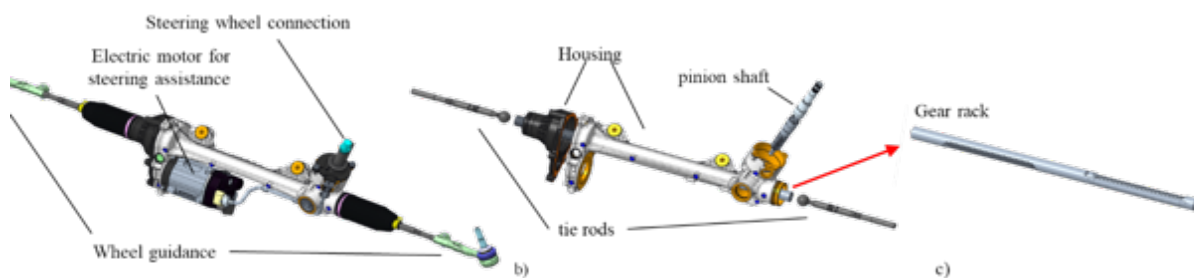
a) steering gear, b) steering gear main components, c) gear rack
